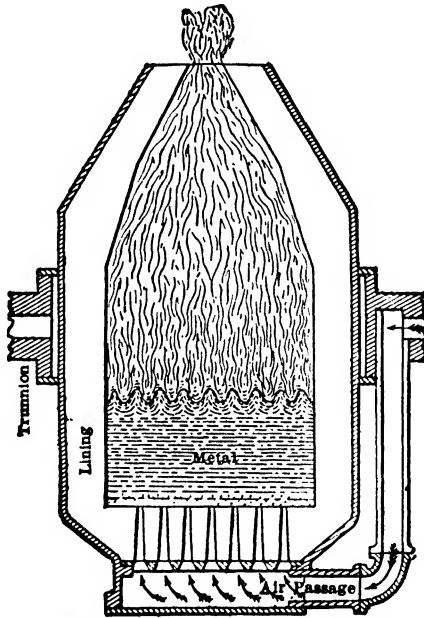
Bessemer converter purifying the metal. (Lake.)
